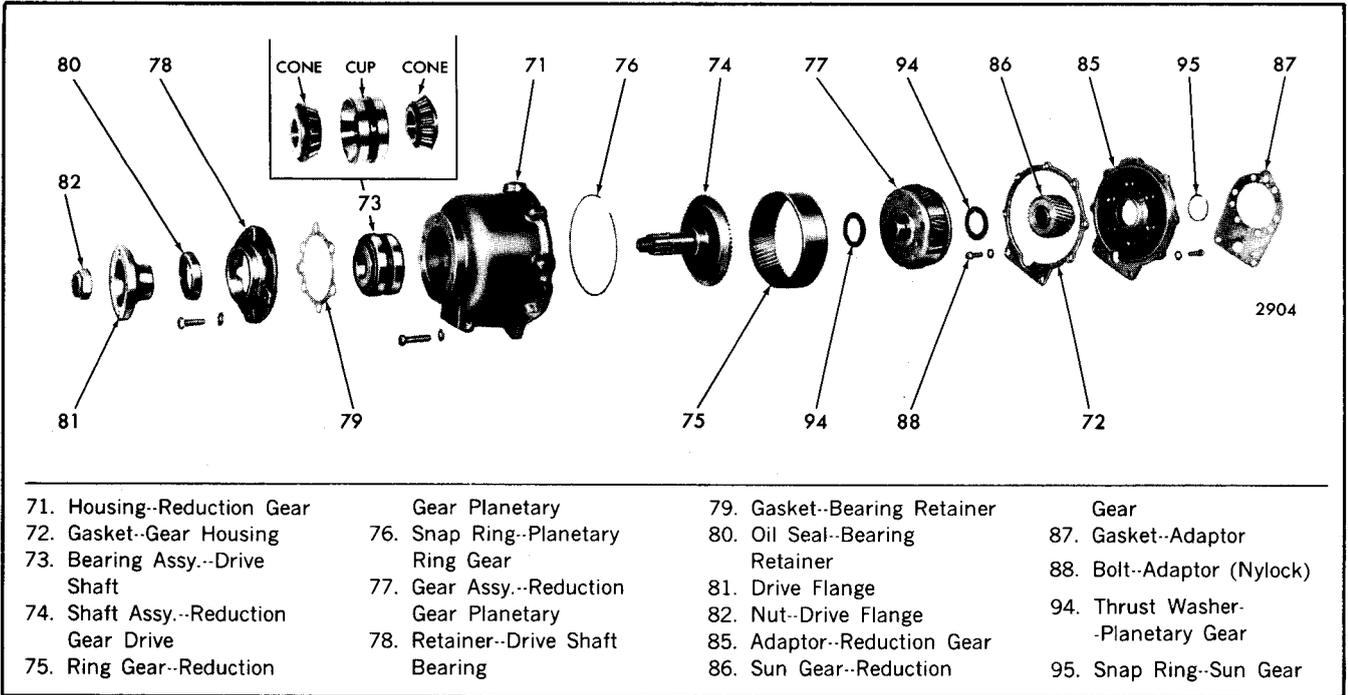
Reduction Gear Details and Relative Location of Parts (2.1:1 Ratio)
